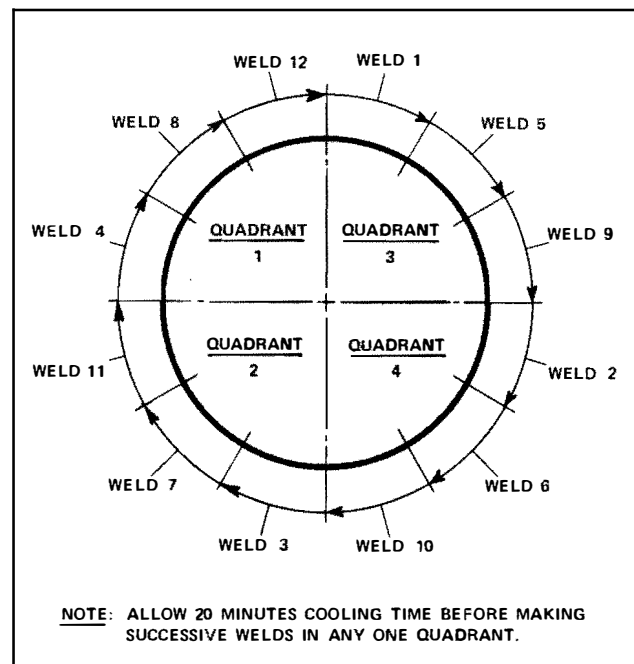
CRW Bushing Installation Welding Procedure When Using the Wet Asbestos Method of Cooling Bushings
